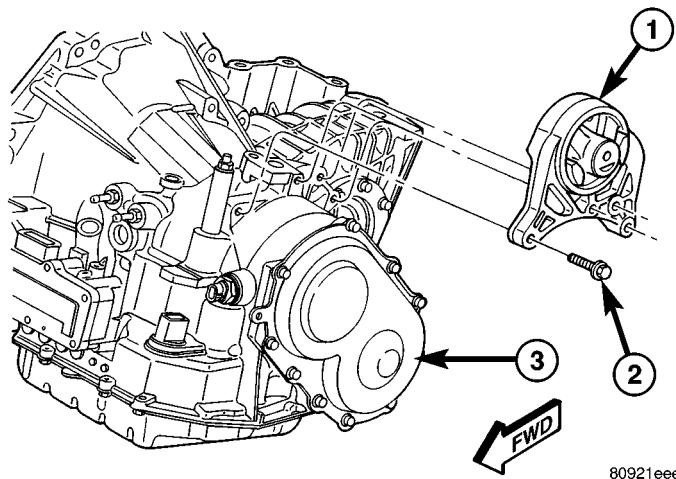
LEFT MOUNT - 41TE TRANSAXLE
